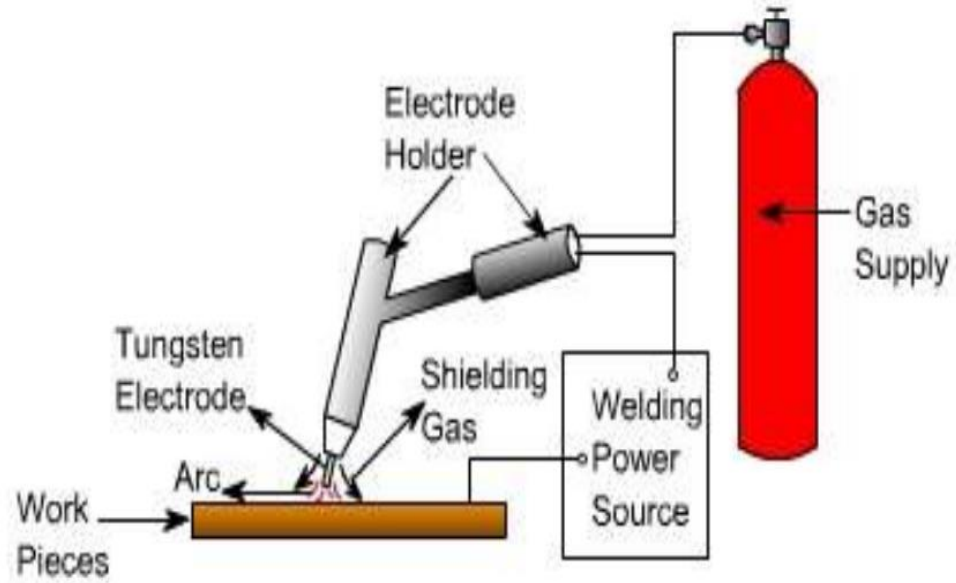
Schematic Diagram of TIG Welding
